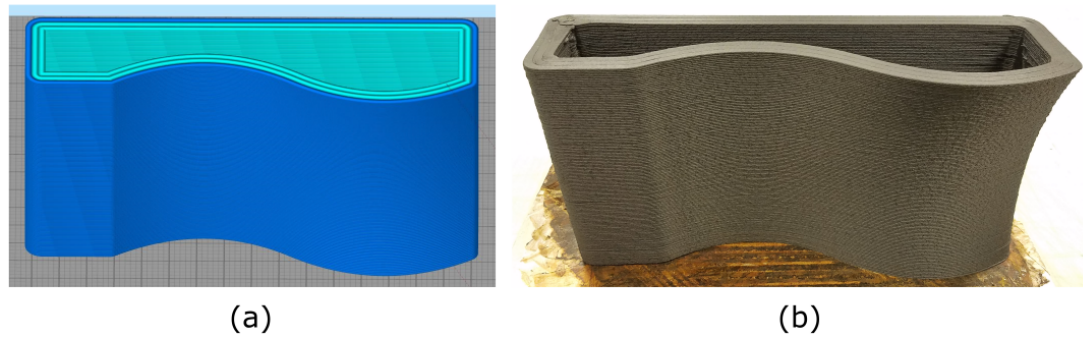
(a) Mold life experiment tool slicing image, and (b) the printed Tool life experiment mold.
